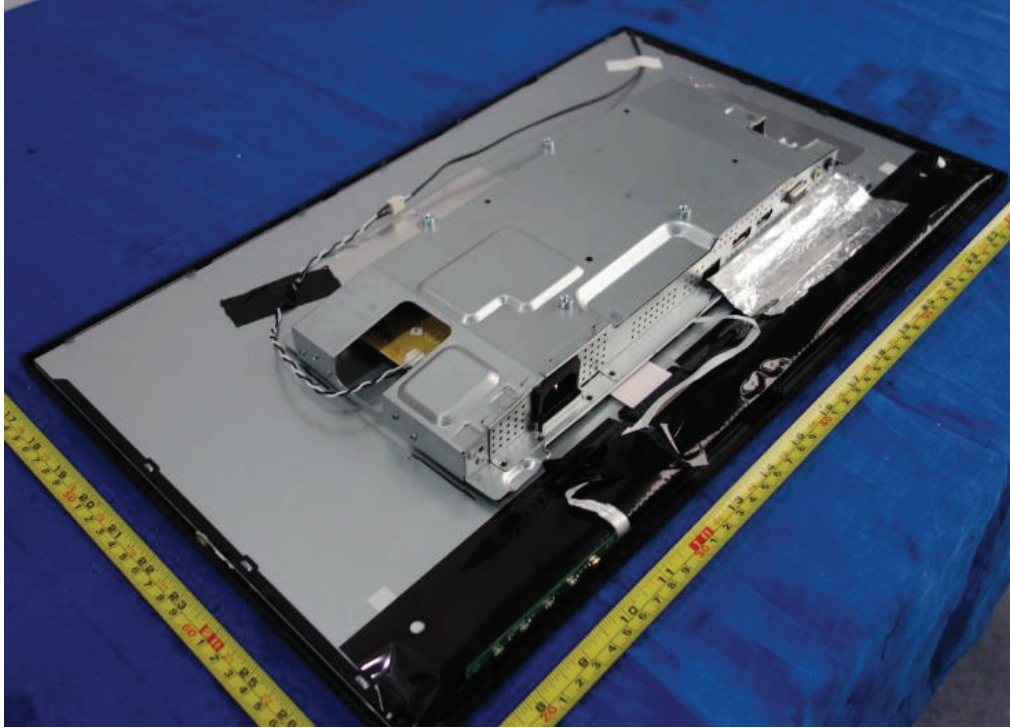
Metal enclosure type C with power board 715G7300 and main board 715G9496
